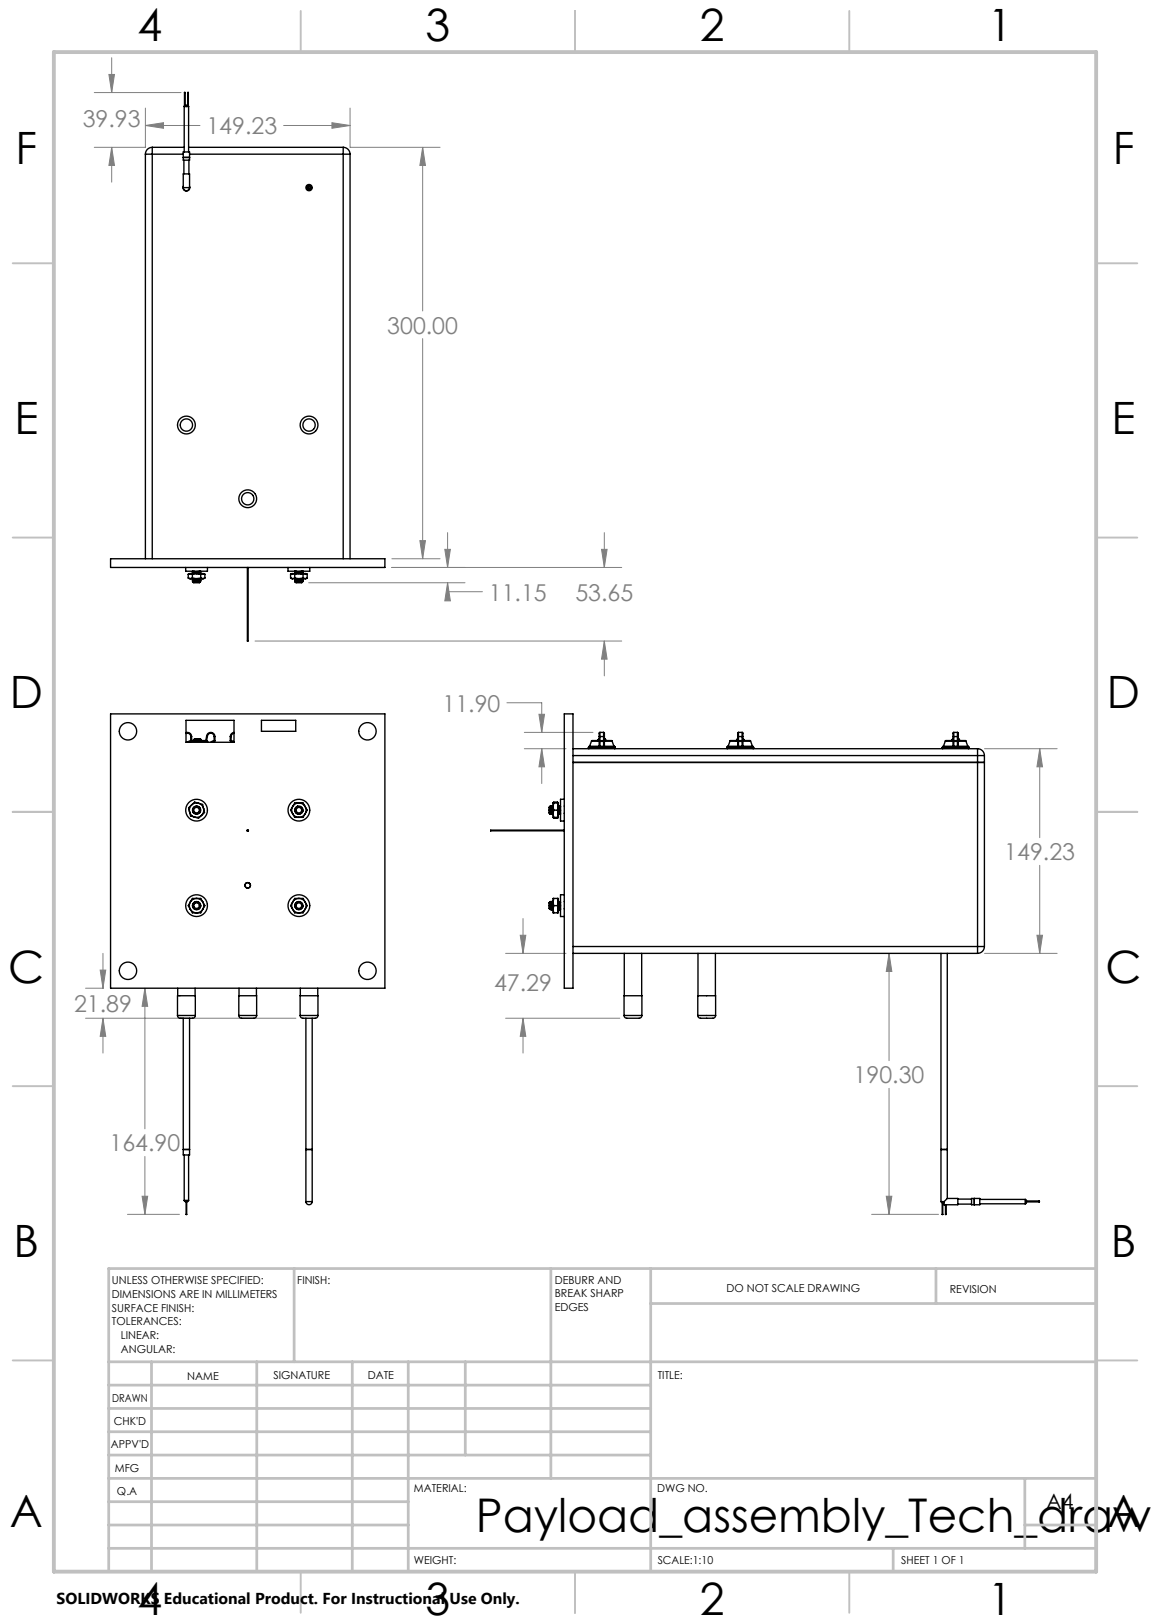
Technical schematic of payload on HASP mounting plate. Dimensions in *mm*.
